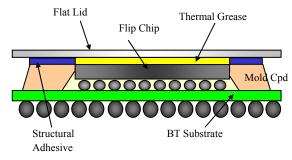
Schematic for Extra Performance Flip Chip BGA (XP-fcBGA) Package - Patent Pending.
